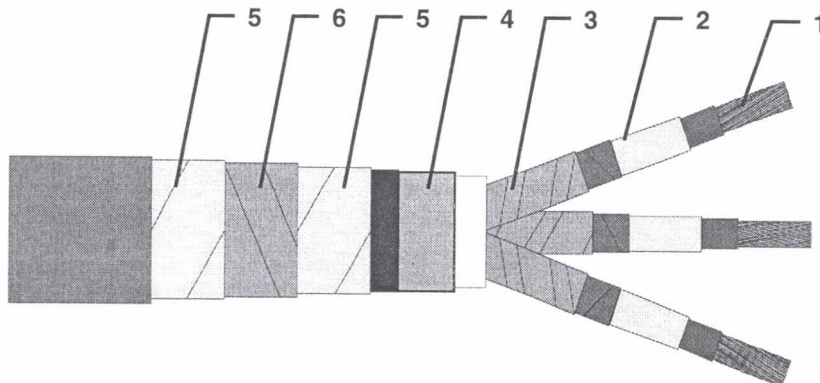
Design of mining trailing cable type OnZGcekHz-G: 1 – conductor, 2 – insulation, 3 – individual screen, 4 – reinforcing steel-wire braid
